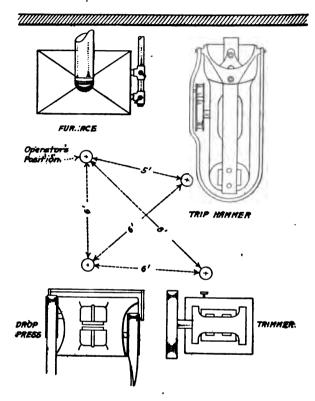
TYPICAL PLAN OF DROP-FORGING DEPARTMENT
